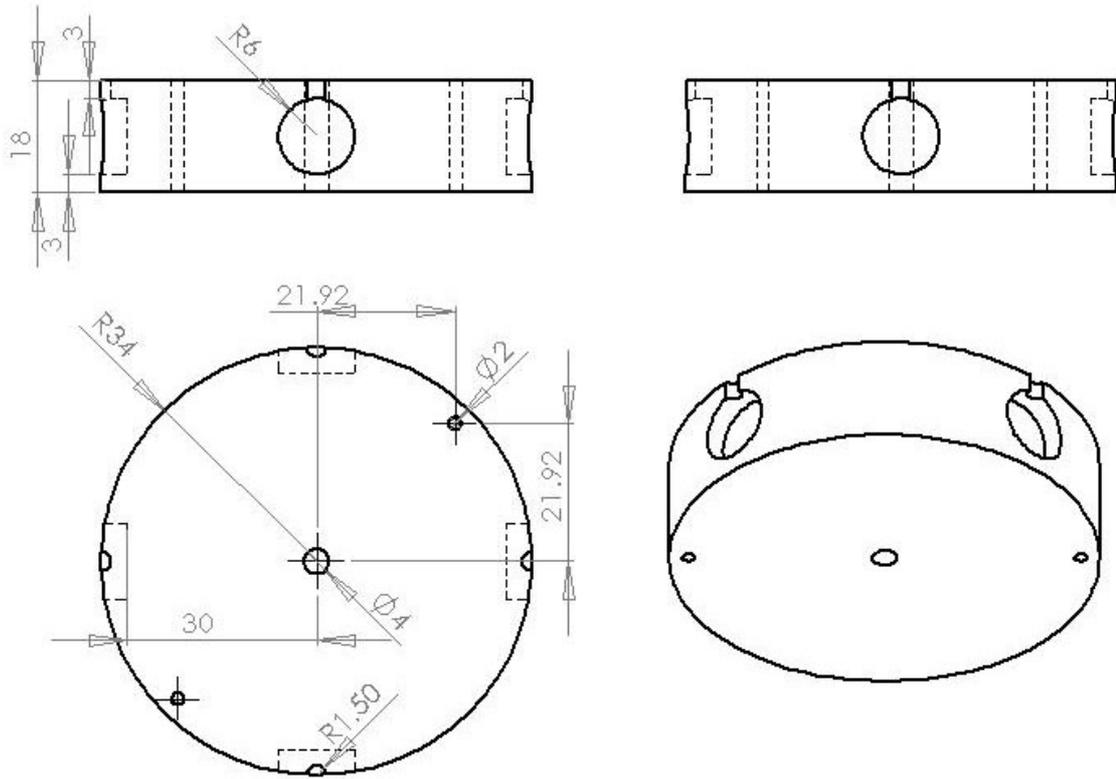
CAD drawing of PVC disk for hard shell prototype.
